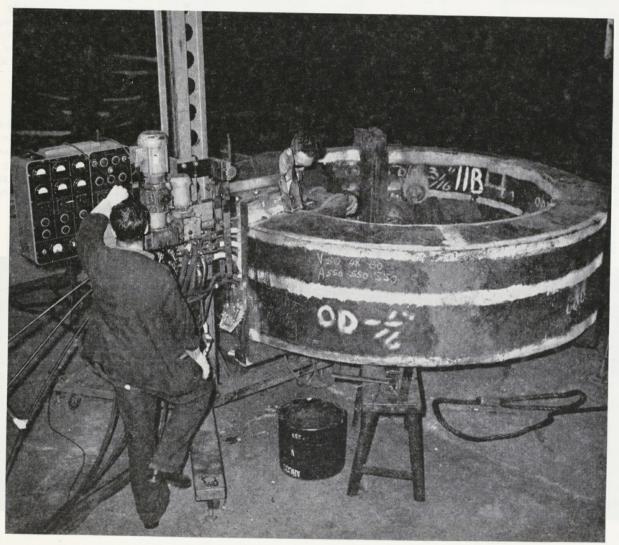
Electroslag welding a 14 in. thick seam of a $\rm CO_2$ nozzle
